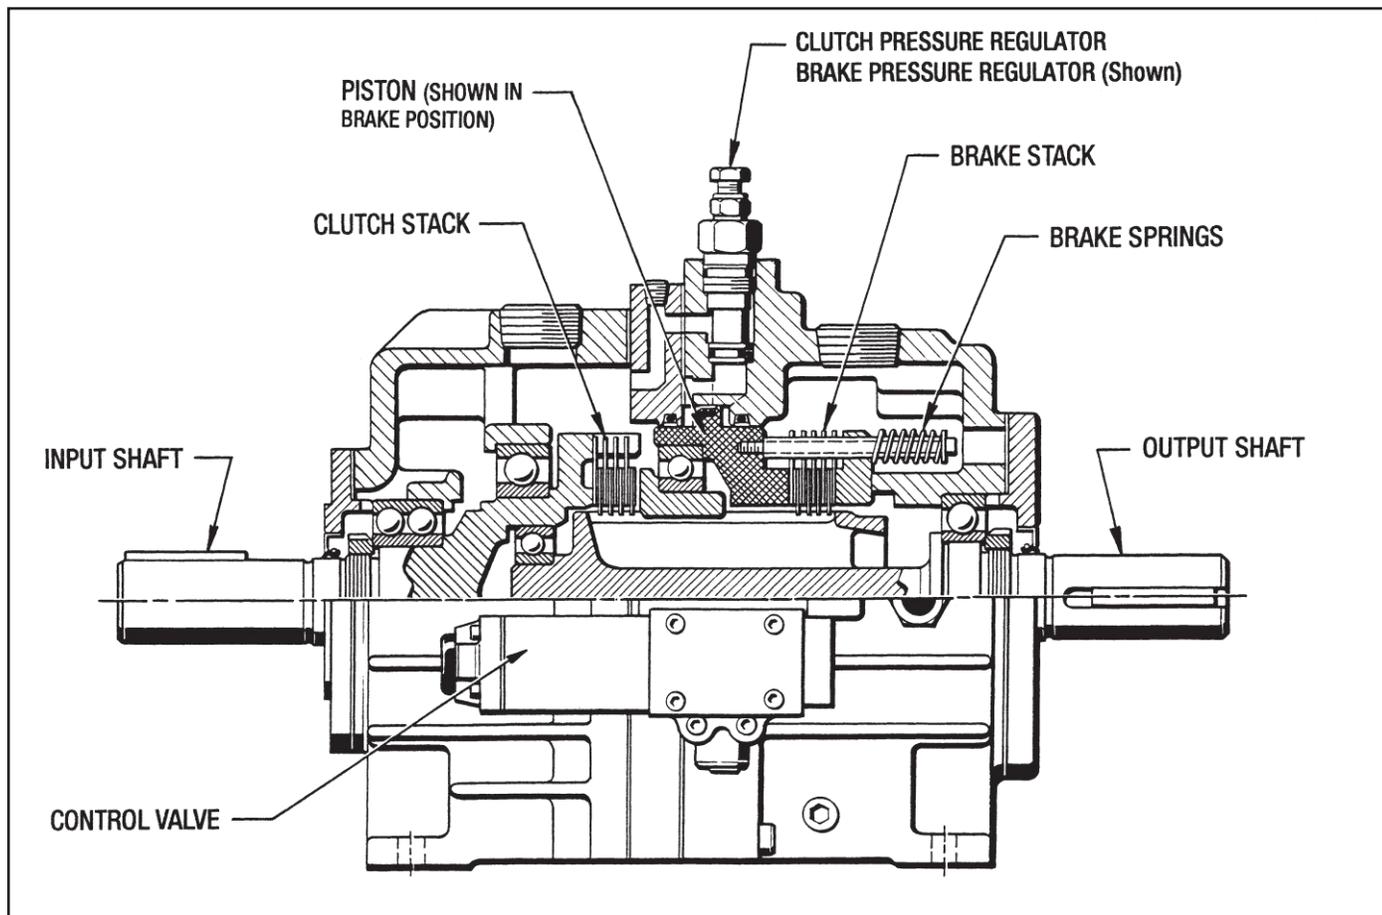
EH-2.5 *Posidyne* Clutch/Brake Unit
